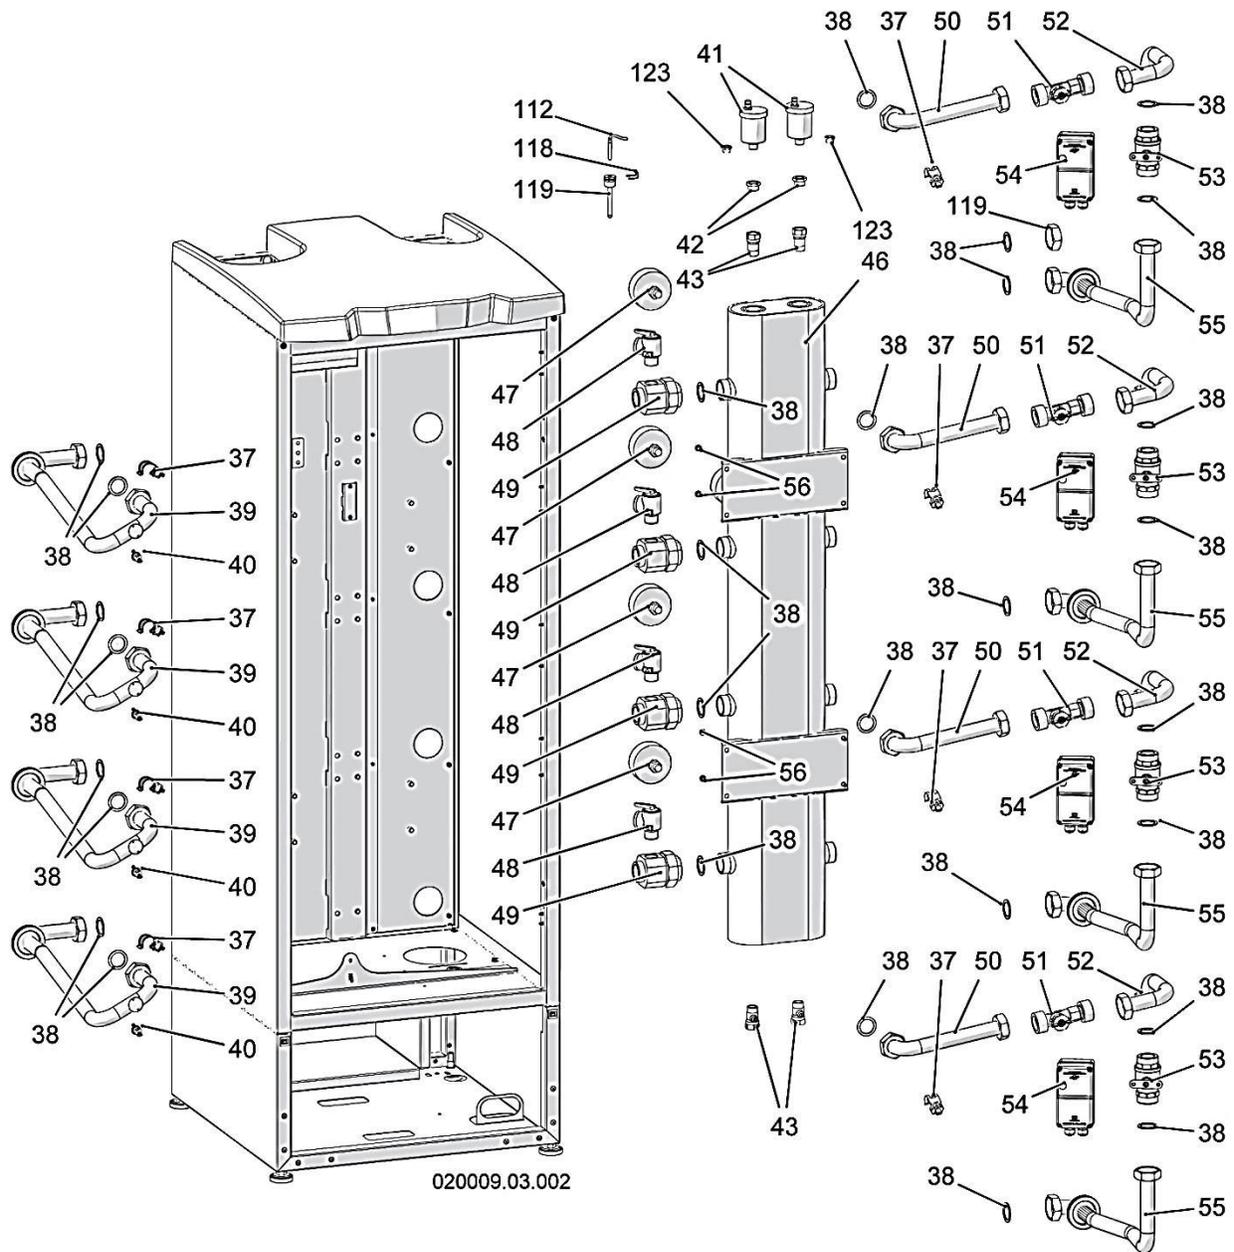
AM 750/1000 General Assembly Parts Drawing (2 of 2)
